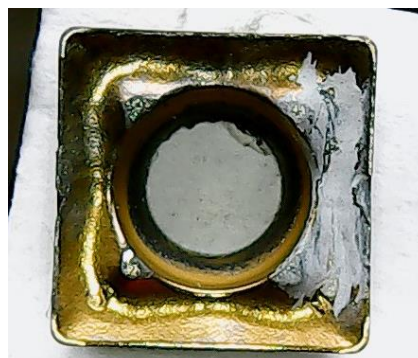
Super Duplex – Tools – LN2 – Drilling.
